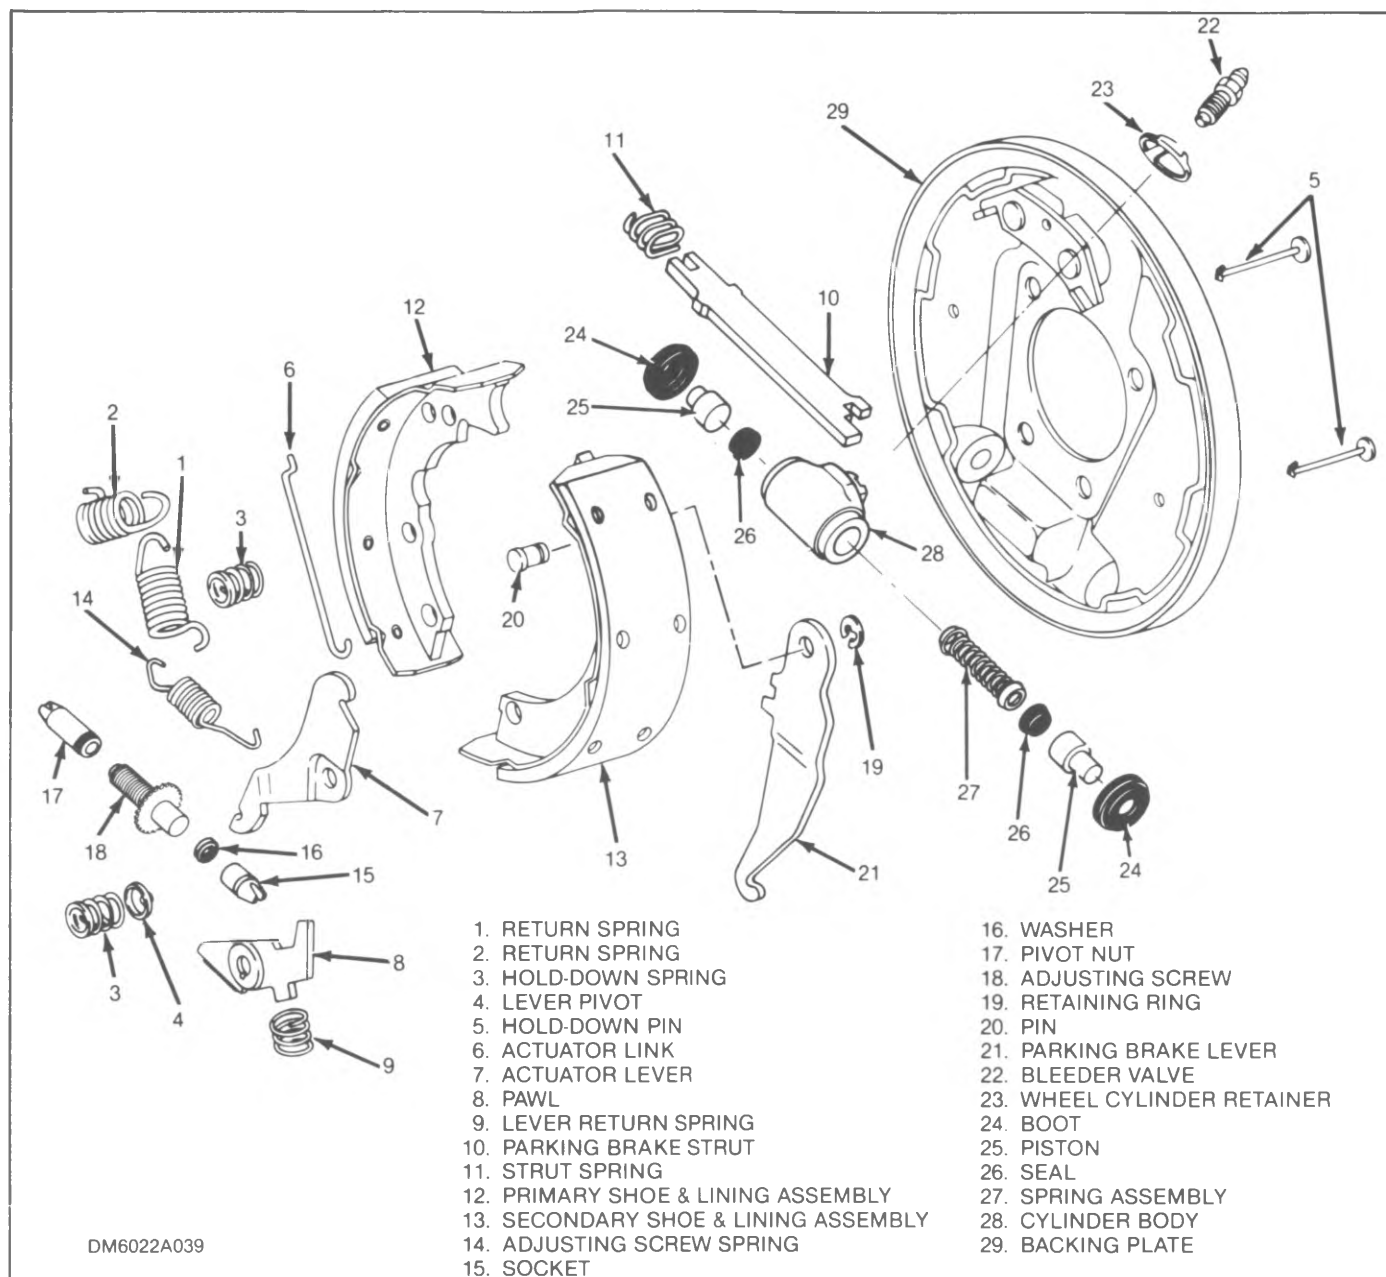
Anchor Plate Drum Brake With Apply Actuated Adjuster
